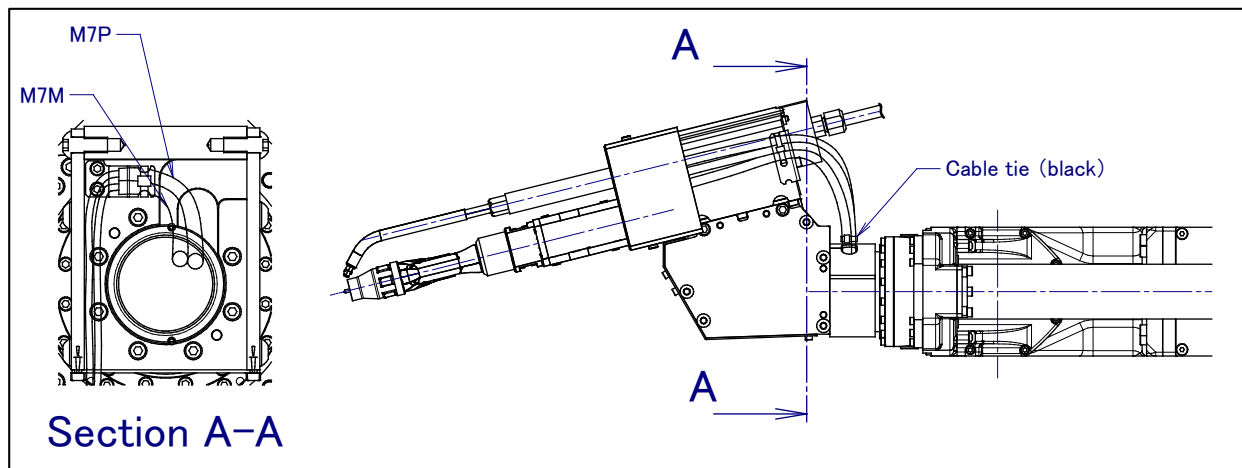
(f) Forming cables to bracket (Servo torch for TIG) (3/5)
